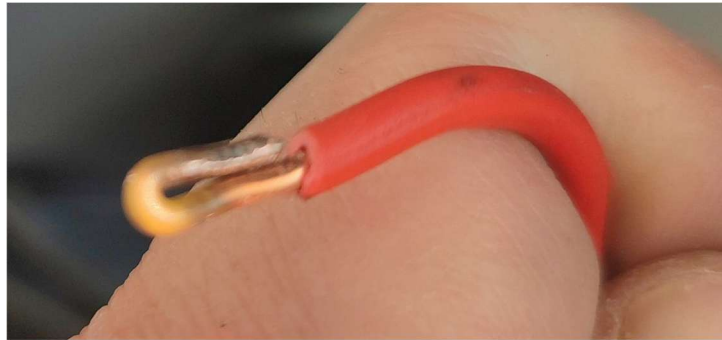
STEP 12g: for solid core wire, fold back and squeeze the wire with a set of pliers to give the cage clamp a better grip.
